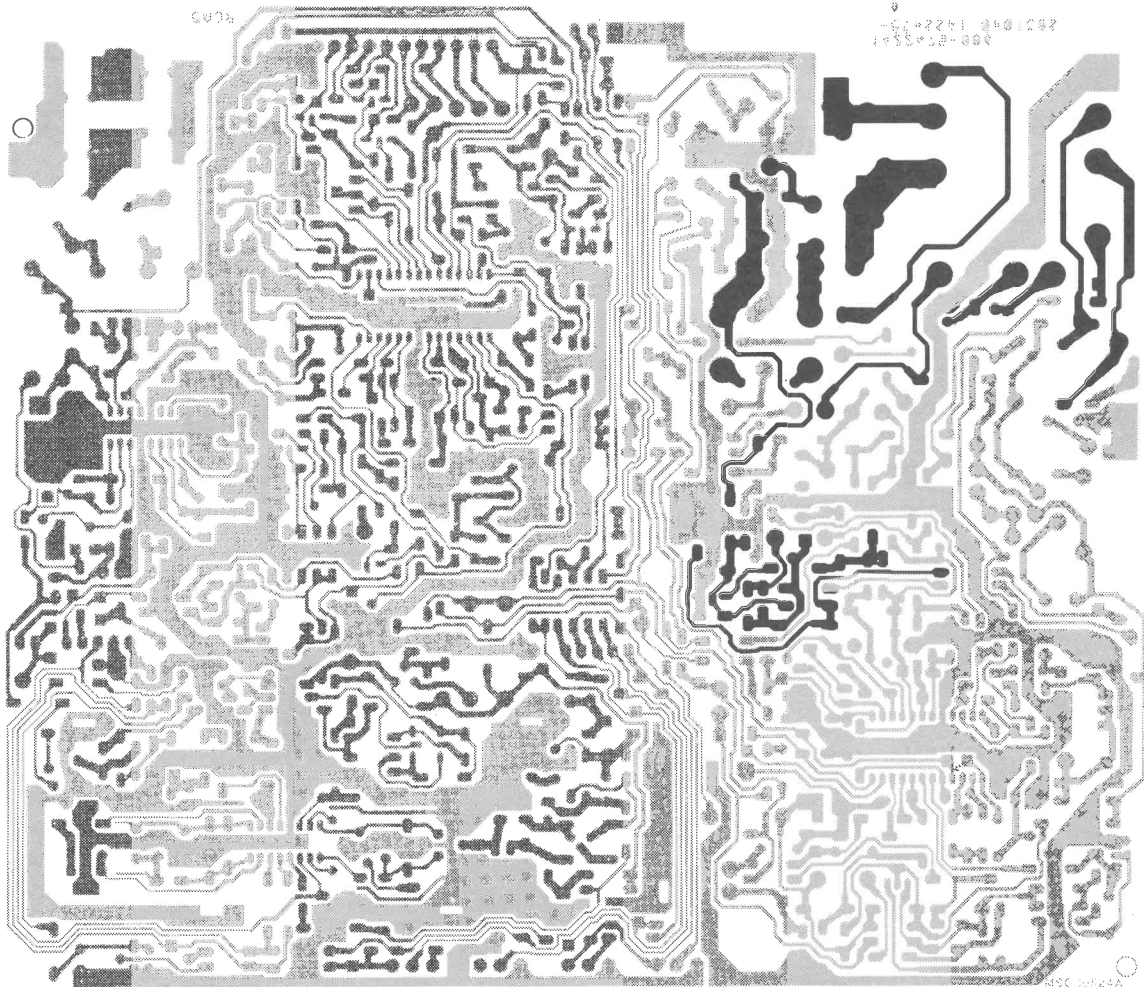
Main Chassis Circuit Board — Critical Copper Pattern
